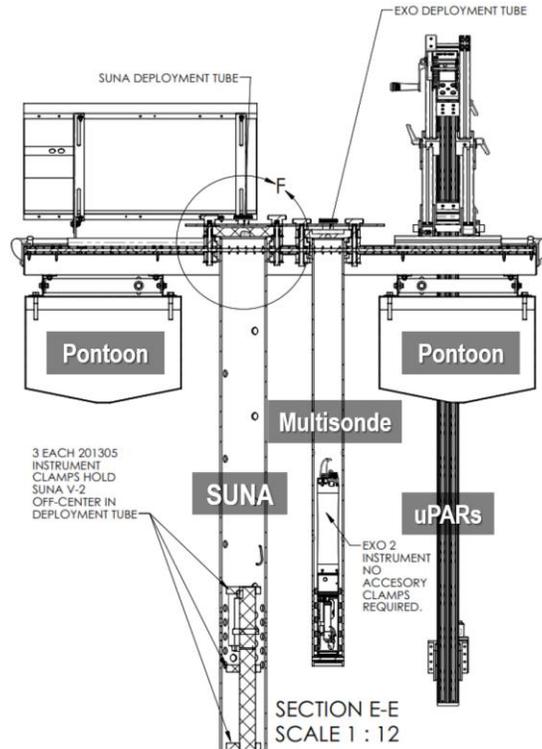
Fixed Submerged Sensors on D03 FLNT AIS Buoy: Multisonde & SUNA Tube Mounts
